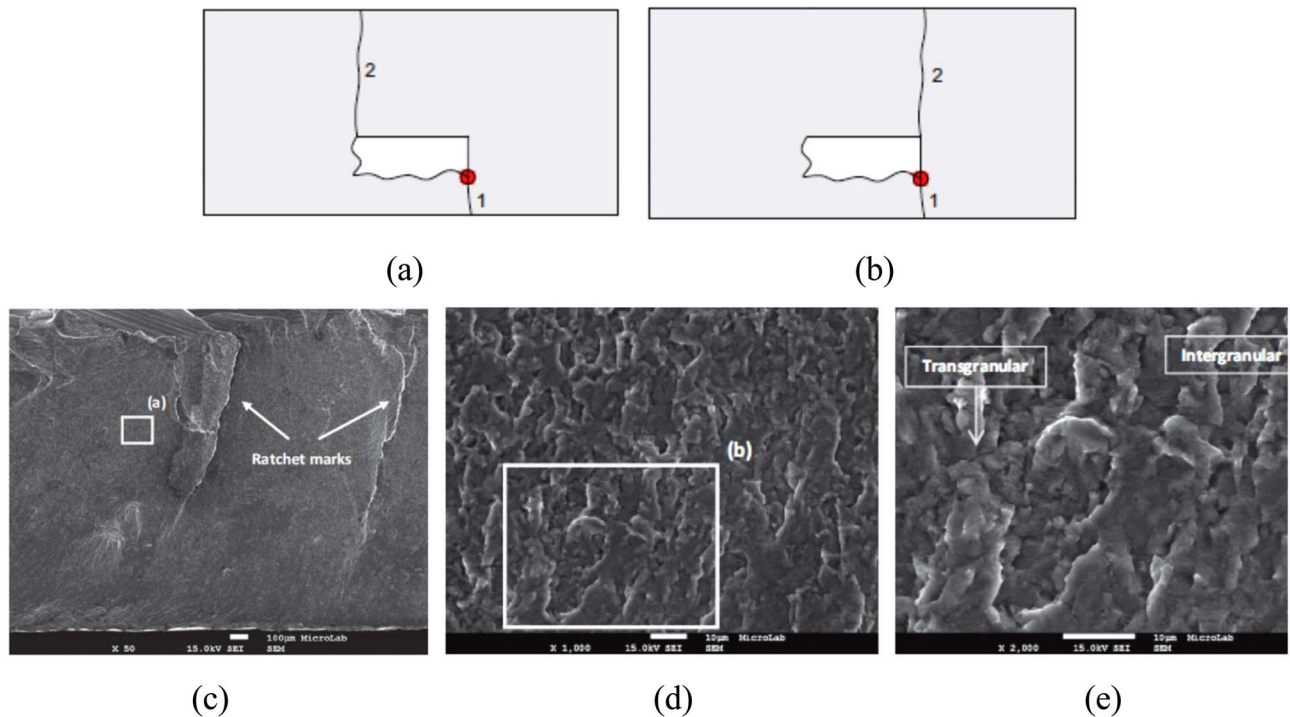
Four point bending fatigue test (a) and (b) crack initiation and propagation and (c), (d) and (e) fracture surfaces.^[43]
